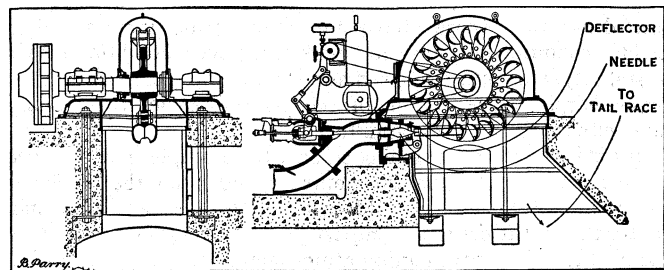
PELTON WHEEL WITH SINGLE NOZZLE
